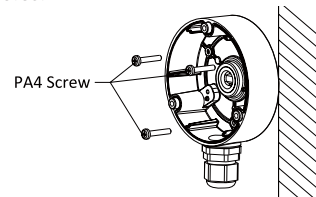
Fix the Gang Box to the Wall/Ceiling
